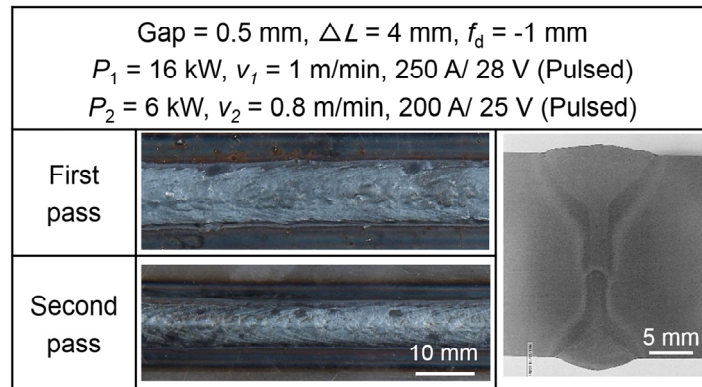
Surface appearances and cross section of weld bead produced by two-sided laser-MAG arc hybrid welding.
